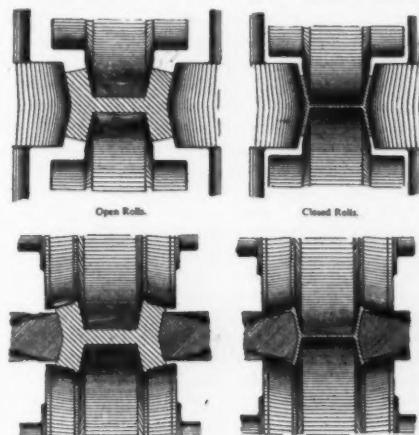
PRIMARY FOUR-ROLL REVERSING UNIVERSAL MILL
